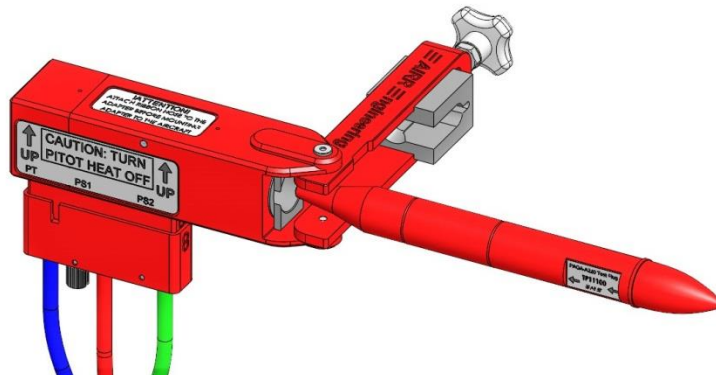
Pitot adapter cam handle in the open position, pusher retracted
